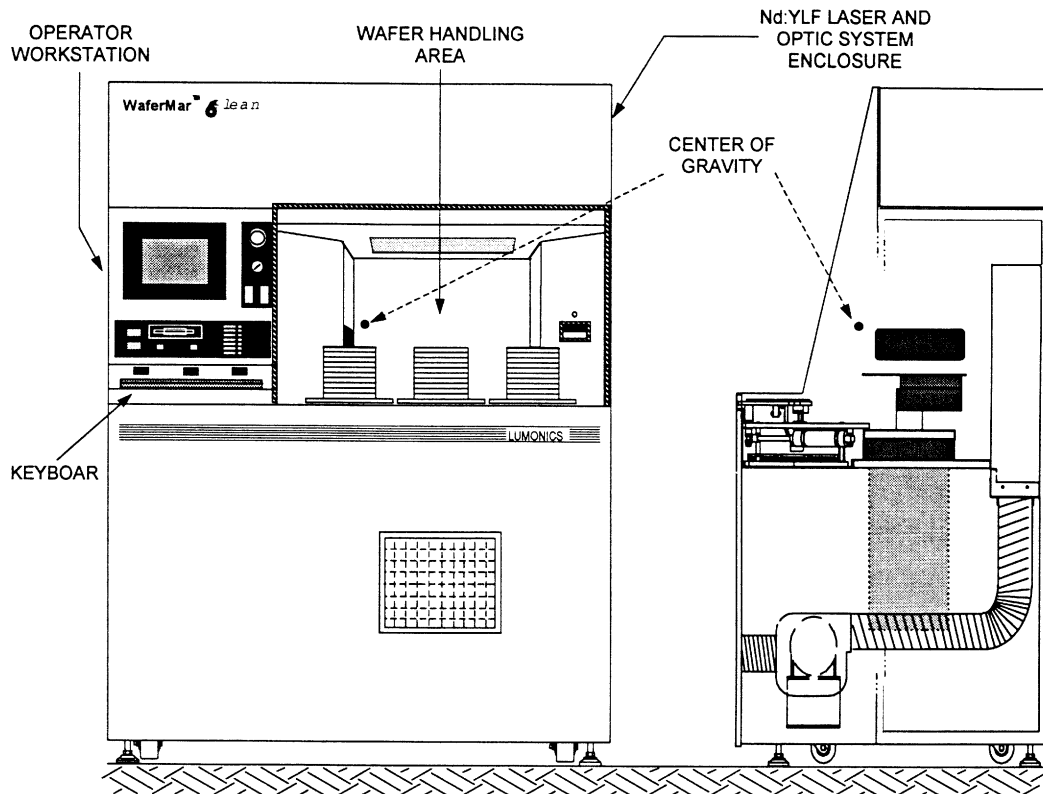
Handler/Control Cabinet — Front and Side Views
